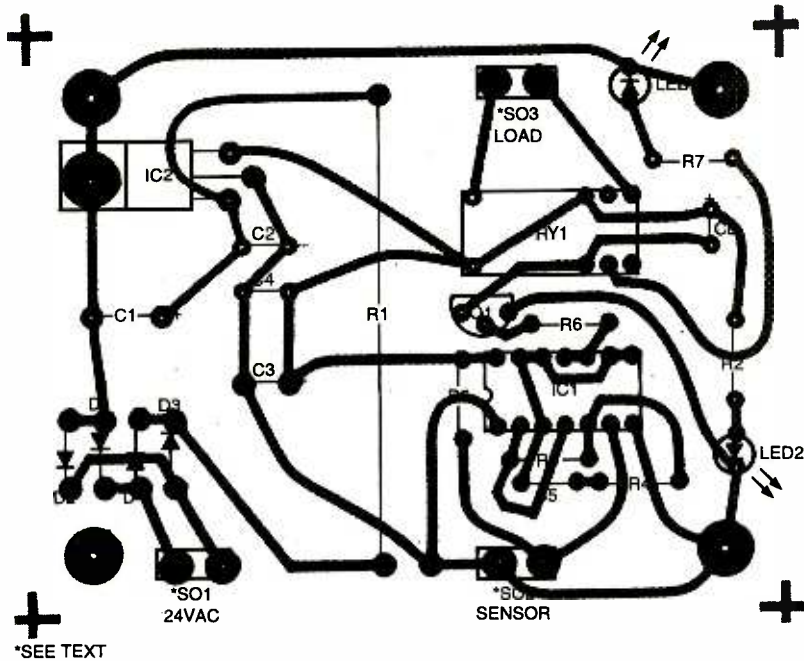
Assemble the printed-circuit board guided by the parts-placement diagram. Once it is assembled, check the board for the usual construction errors.
